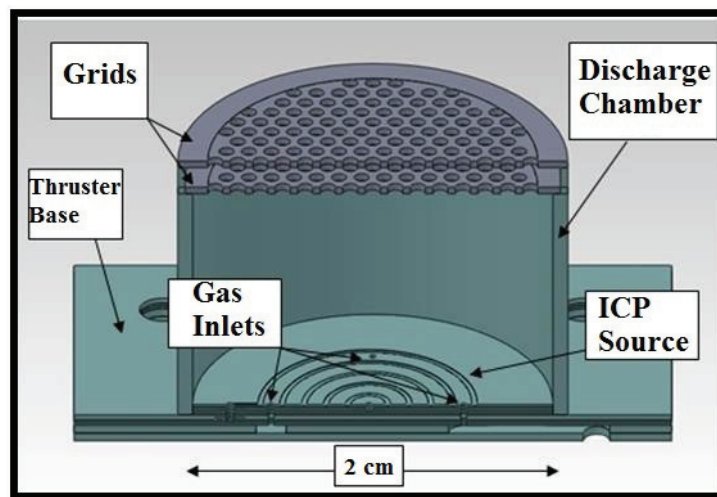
Cutaway drawing of the assembled miniature rf ICP source ion thruster.
